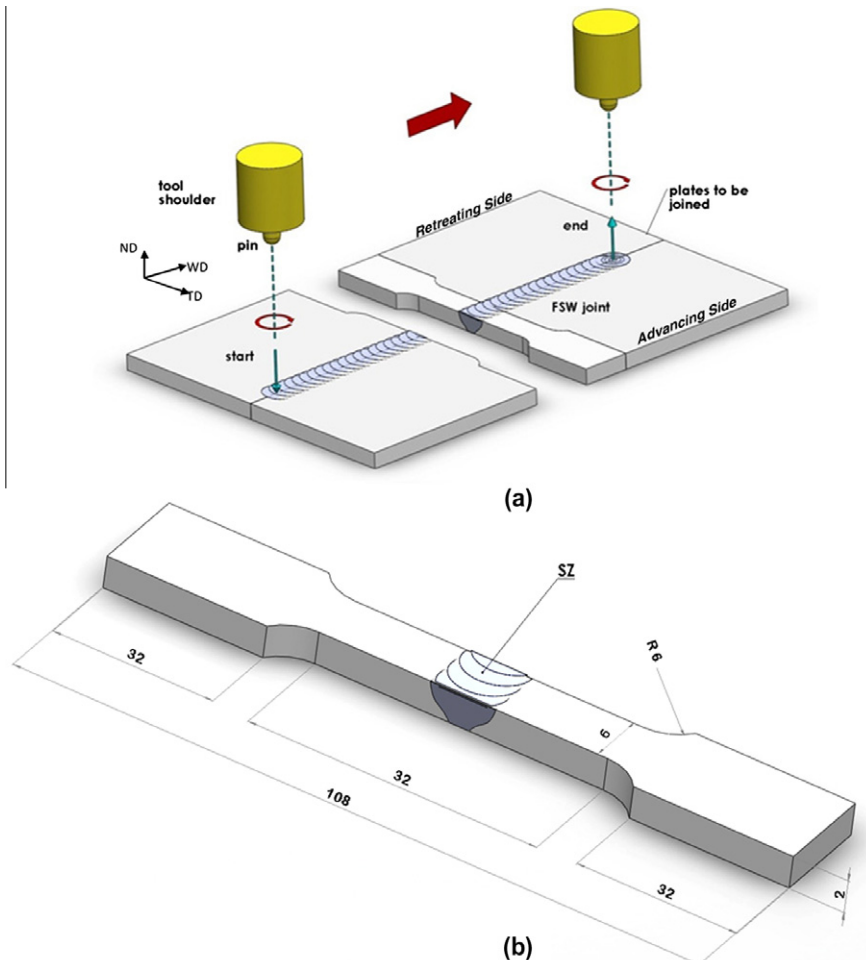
Schematic of how the tensile sample was extracted from the welded piece and the dimensions of the tensile sample.
